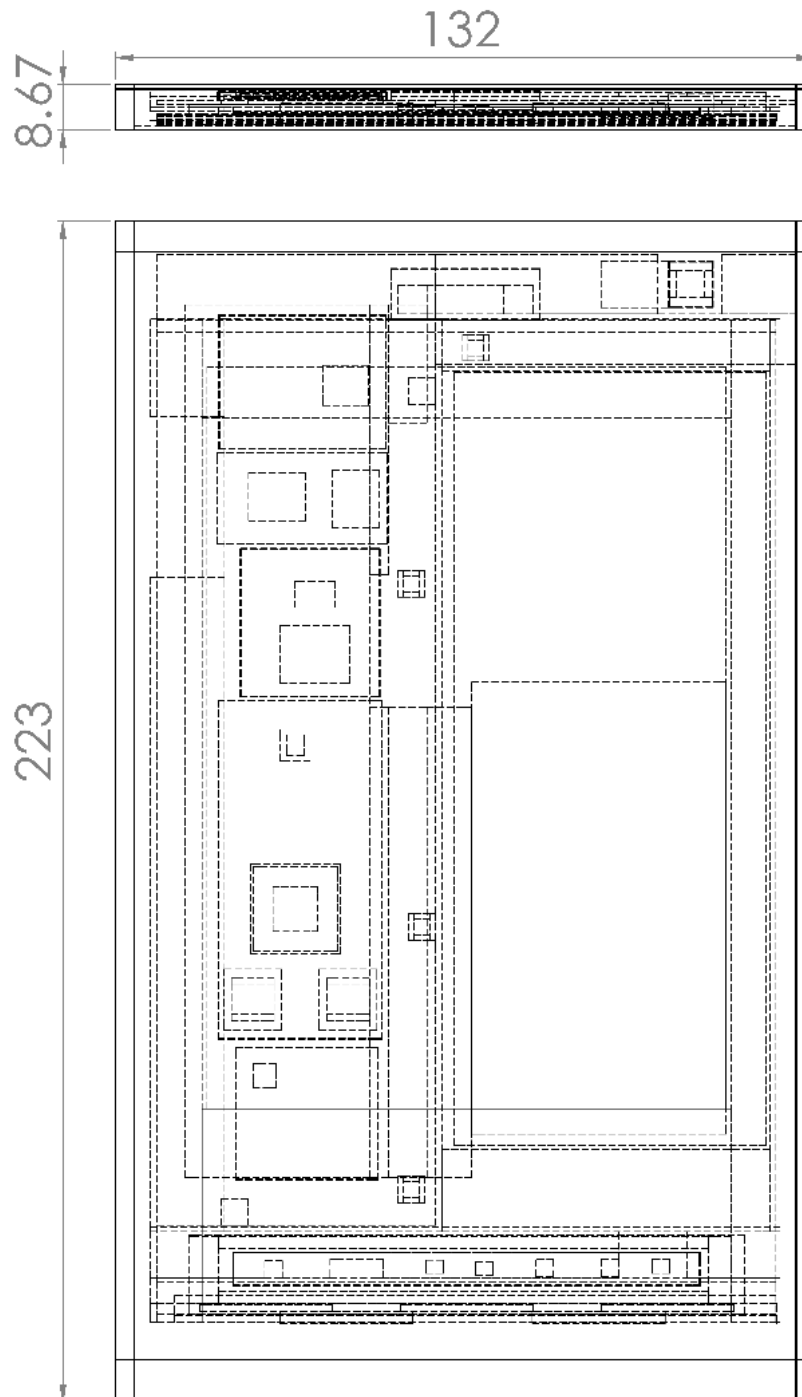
Dimensioned drawing of the tablet geometry, dimensions given in mm
